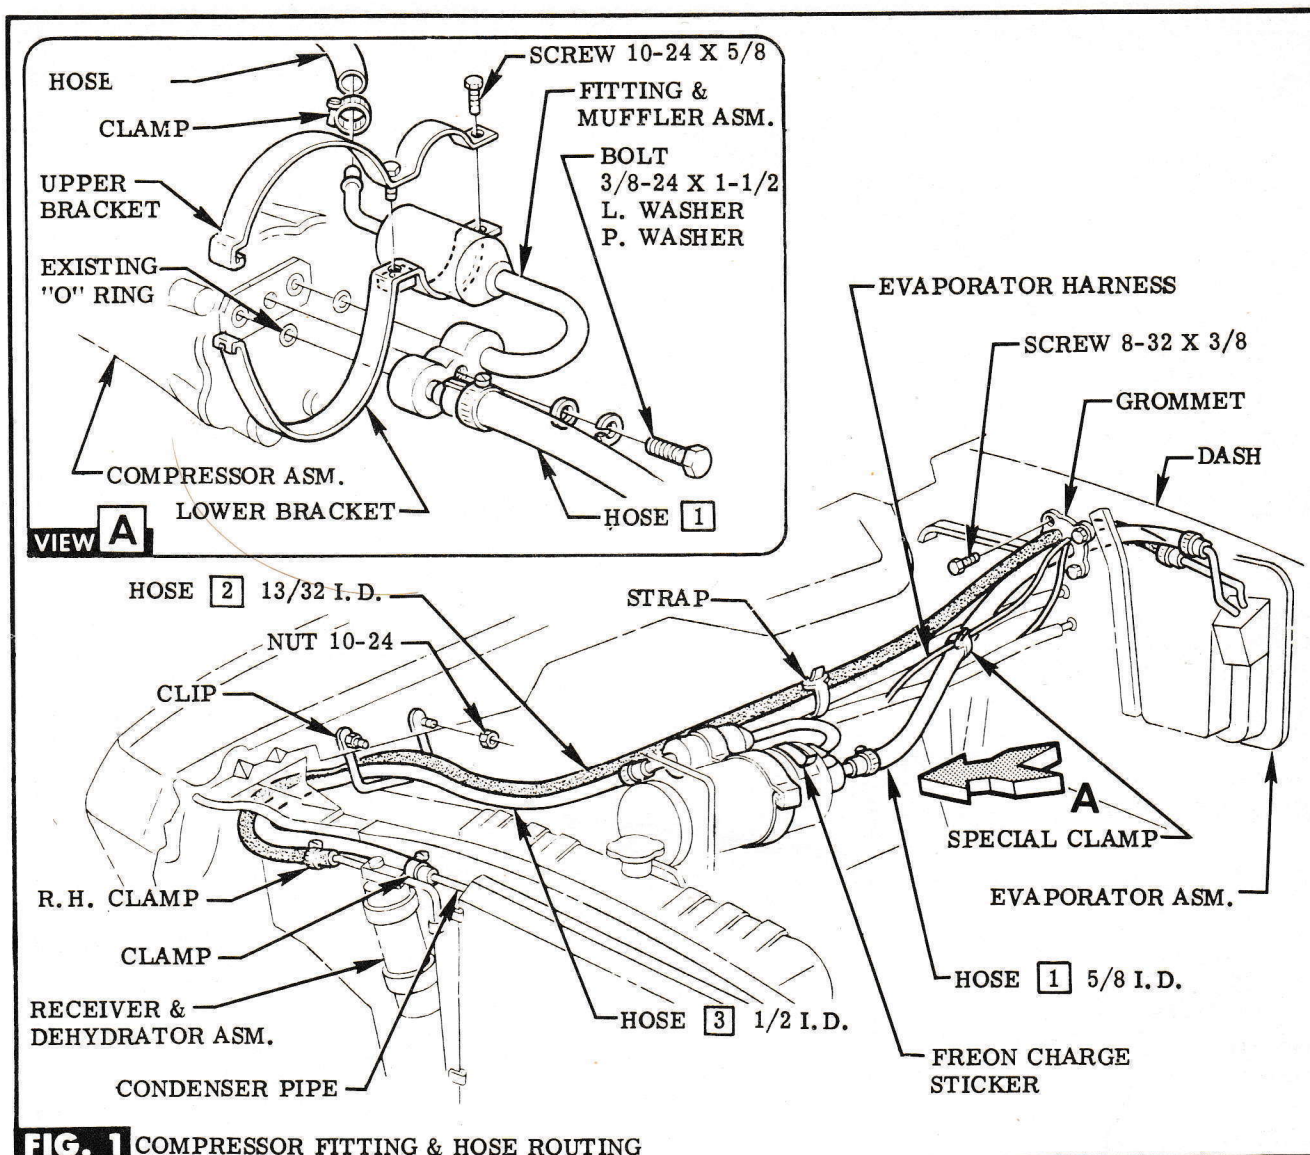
COMPRESSOR FITTING & HOSE ROUTING
